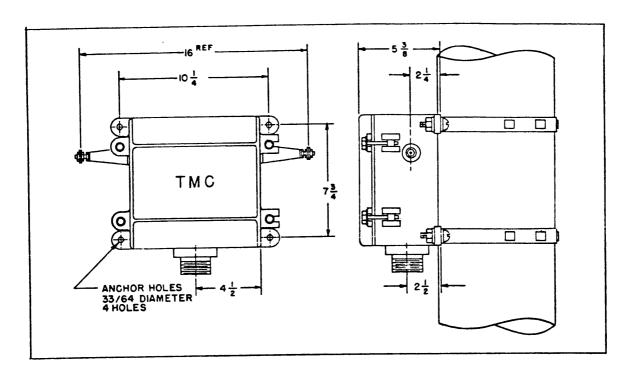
Outline and Mounting Dimensions, Model TRC-500
